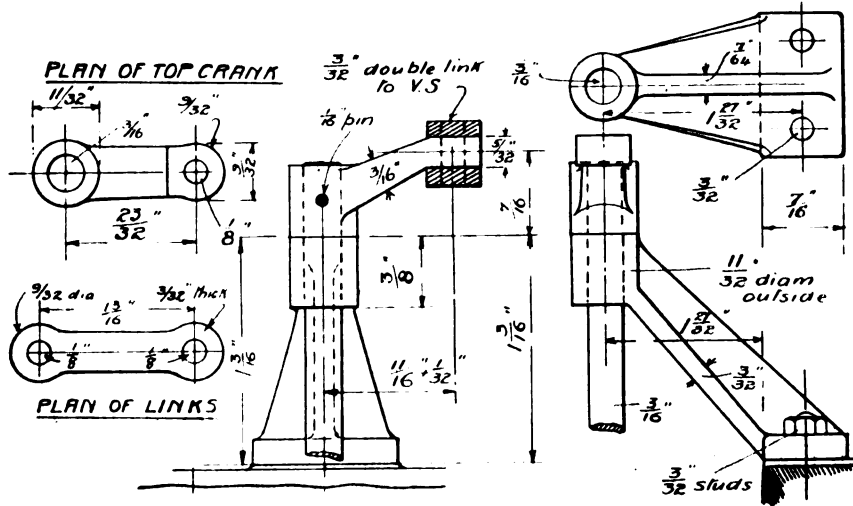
DETAILS OF VALVE GEAR. (Full size.)
